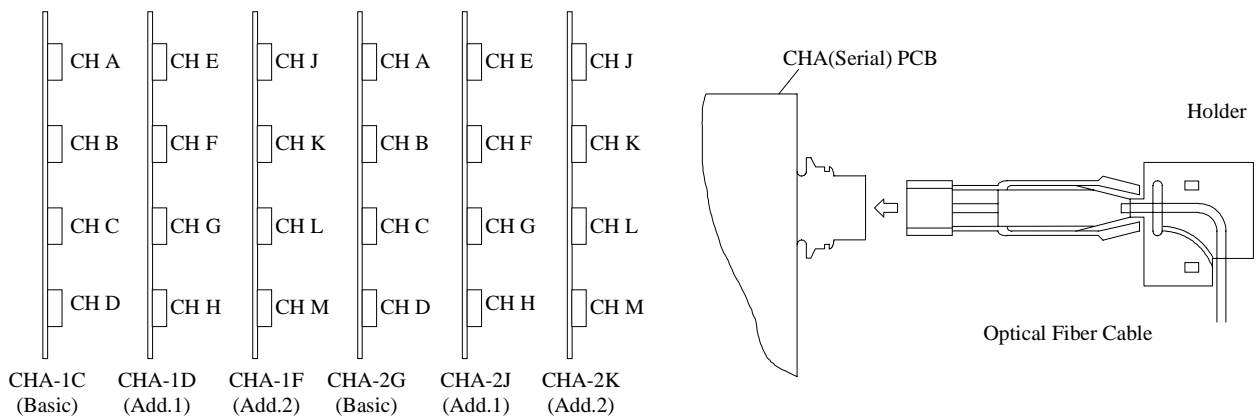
Connection of Optical Fiber Cable
